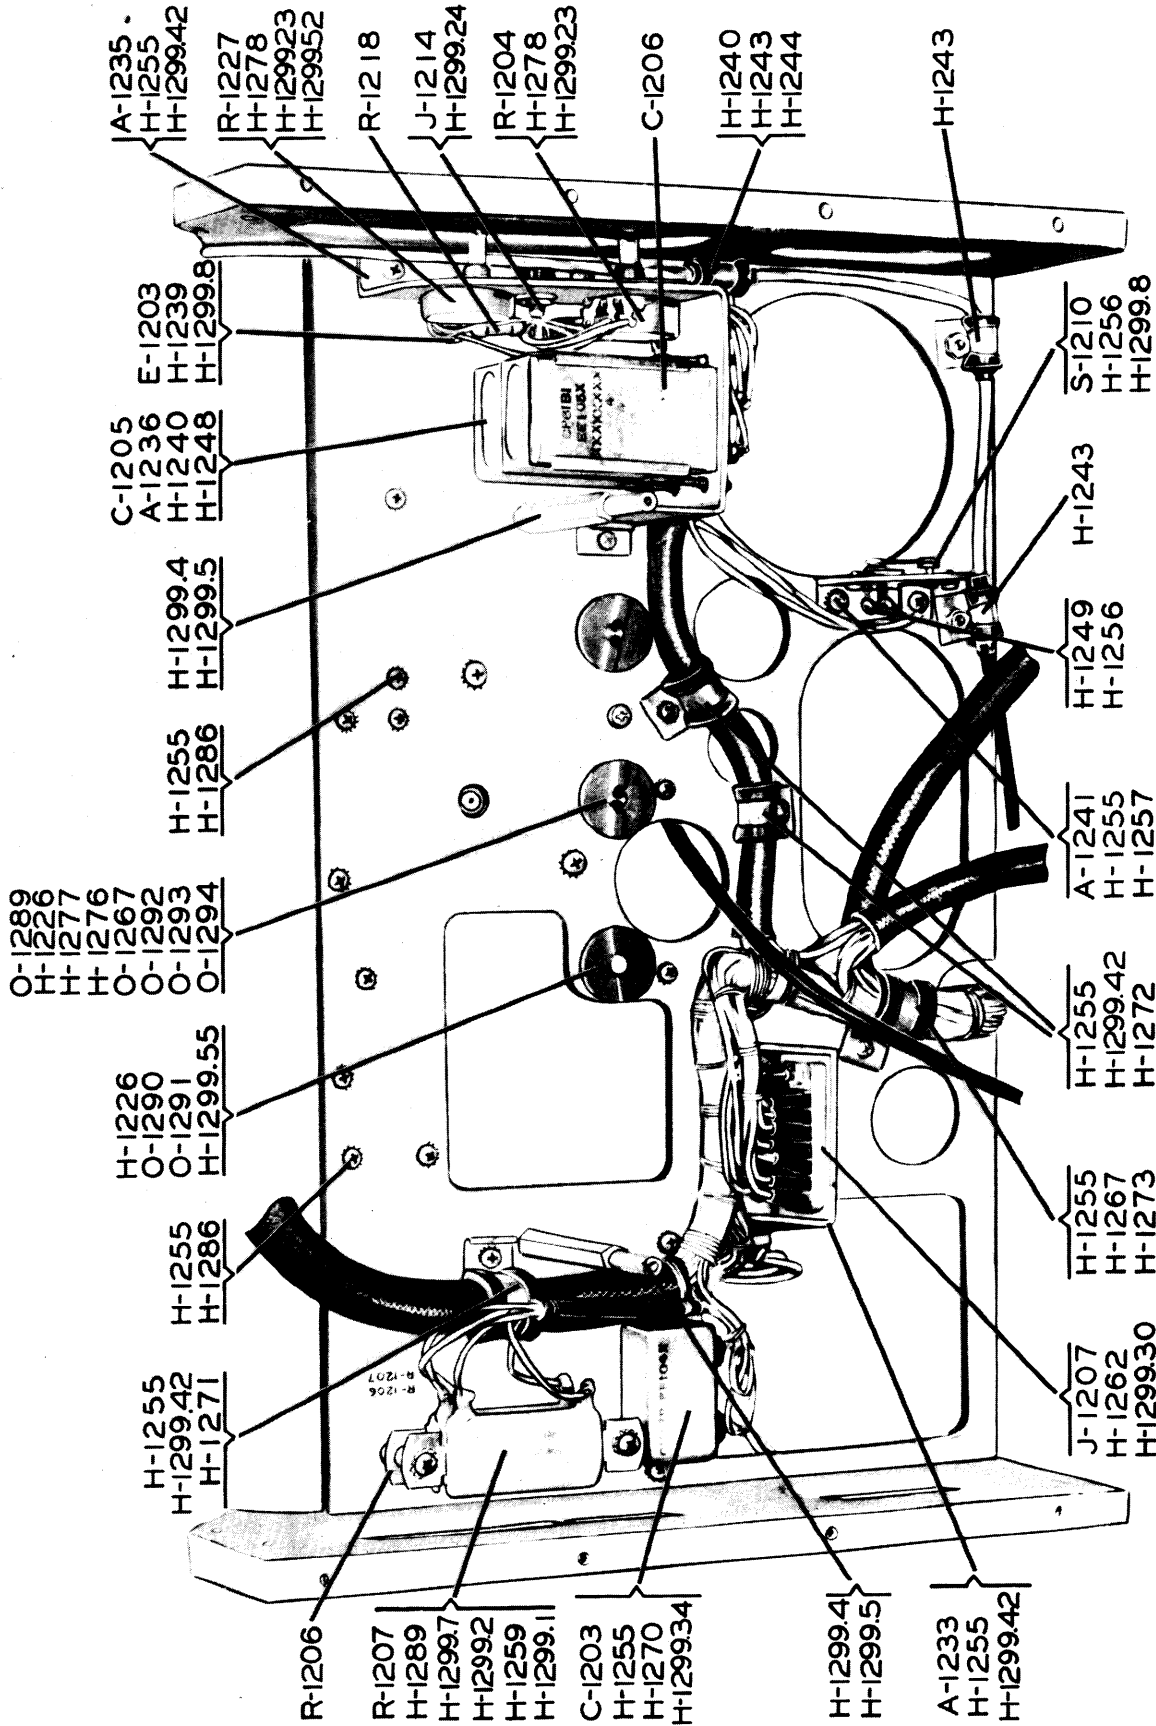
Radio Transmitter, Front View with Front Panel Removed
